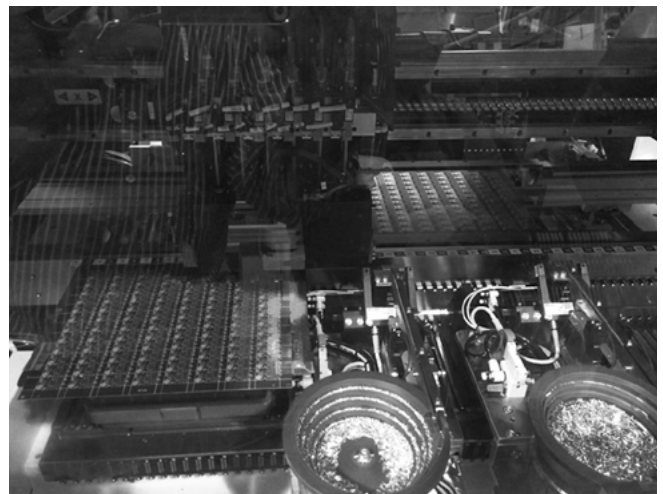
Typical vibratory bowl feeders mounted on standard SMT placement machine.
